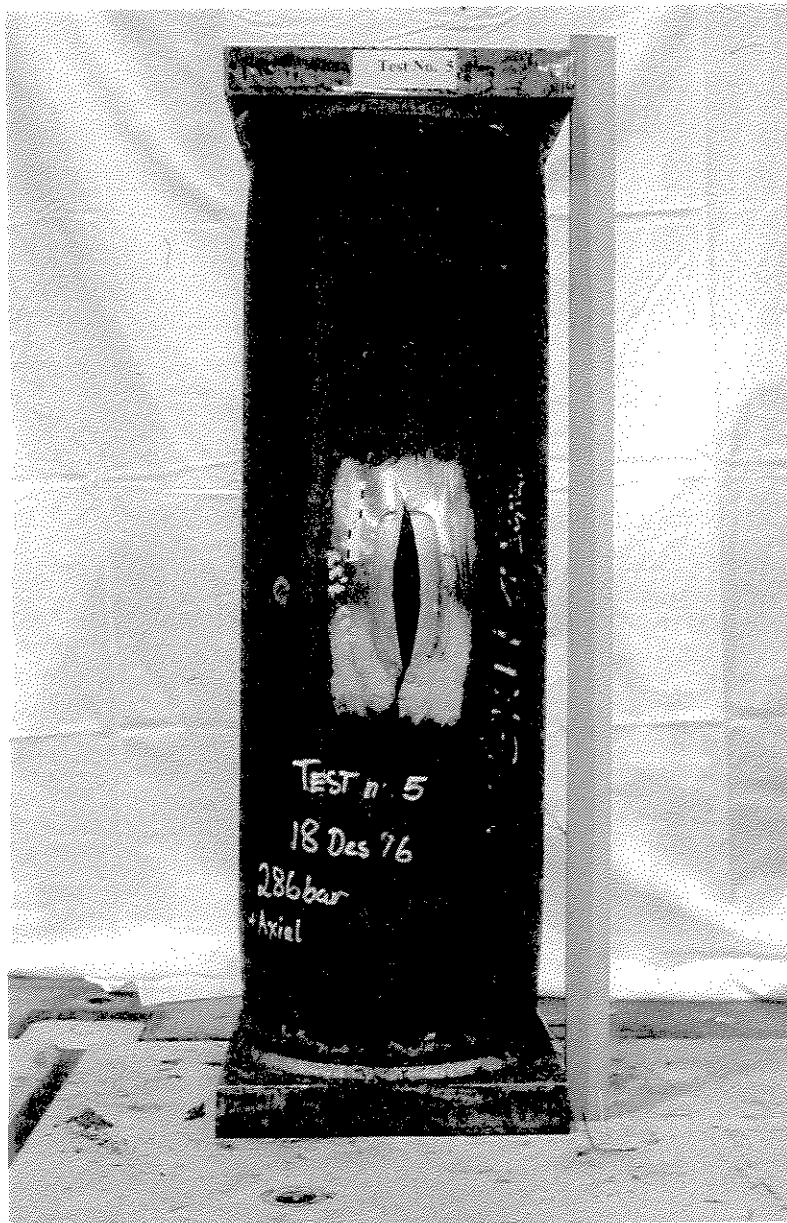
Picture of the test specimen no. 5 after the burst test
